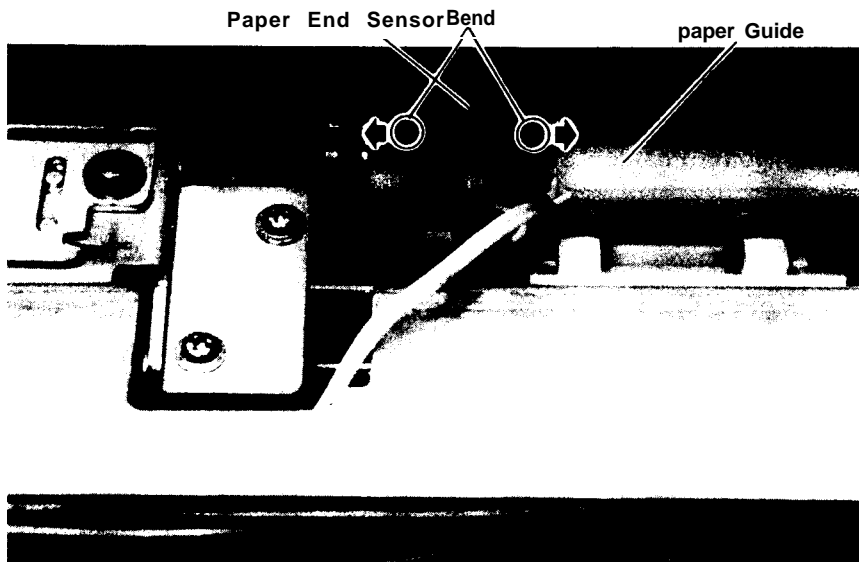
Paper End Sensor Removal (Rear of Printer Mechanism)
